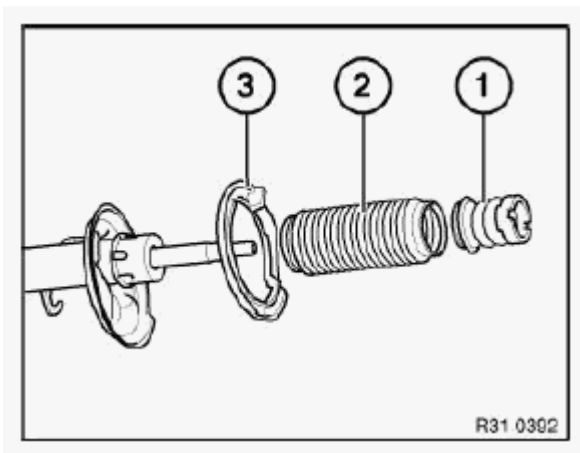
Lower Spring Pad, Auxiliary Damper And Gaiter
